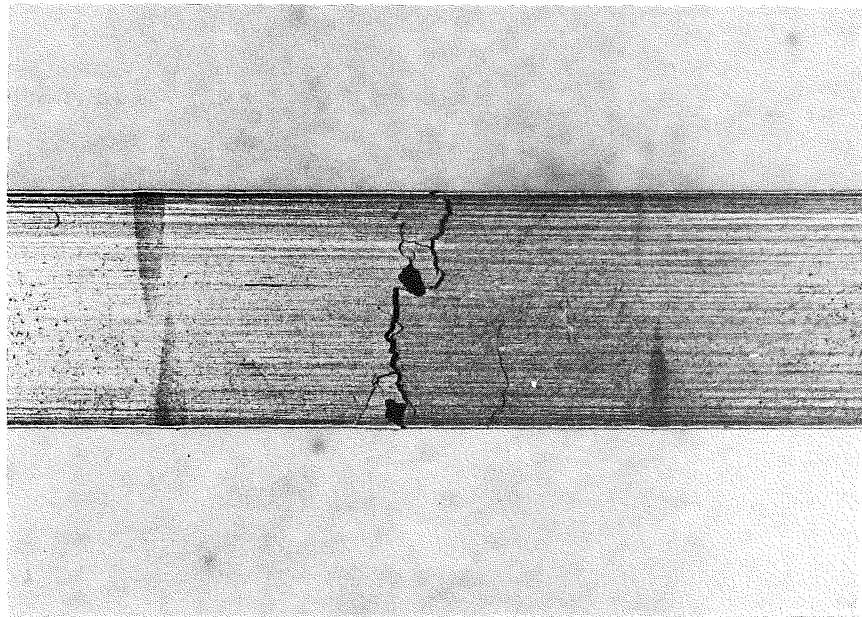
Edge view of specimen F5 showing natural cracks at fusion line.
